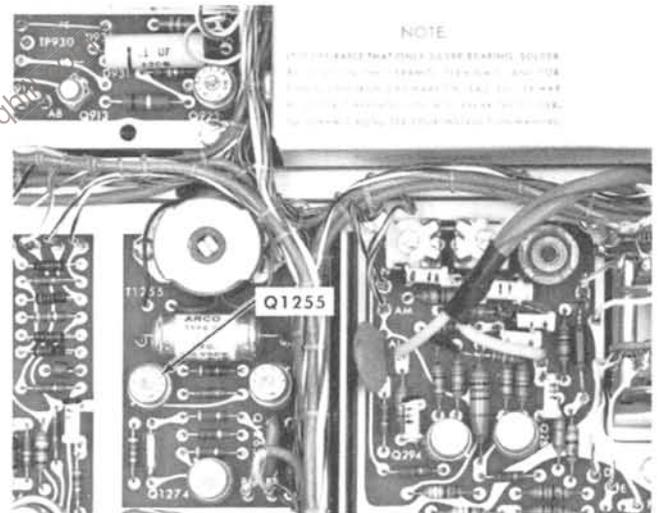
Location of Q1255 (Calibrator section of A Sweep board).
